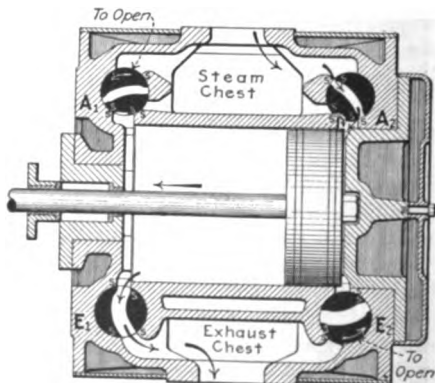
Vertical section through cylinder and valves of Harrisburg four-valve engine.
